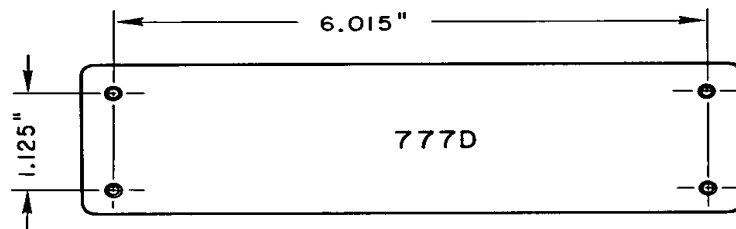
Lateral Dimensions of Tapped Mounting Holes
